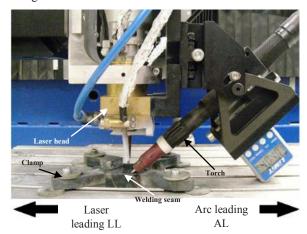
Welding area with the two different welding configurations (LL and AL).
